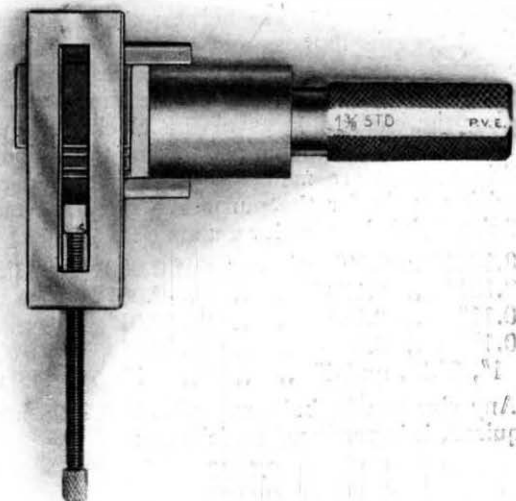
TESTING SIZE OF PLUG GAUGE WITH SLIPS AND JAWS.
